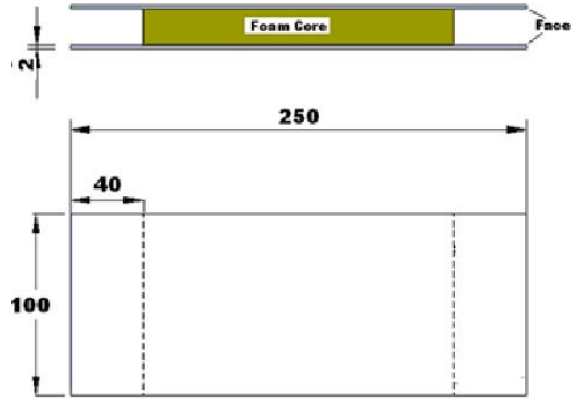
Pilot specimen dimension (All dimensions are in mm).
